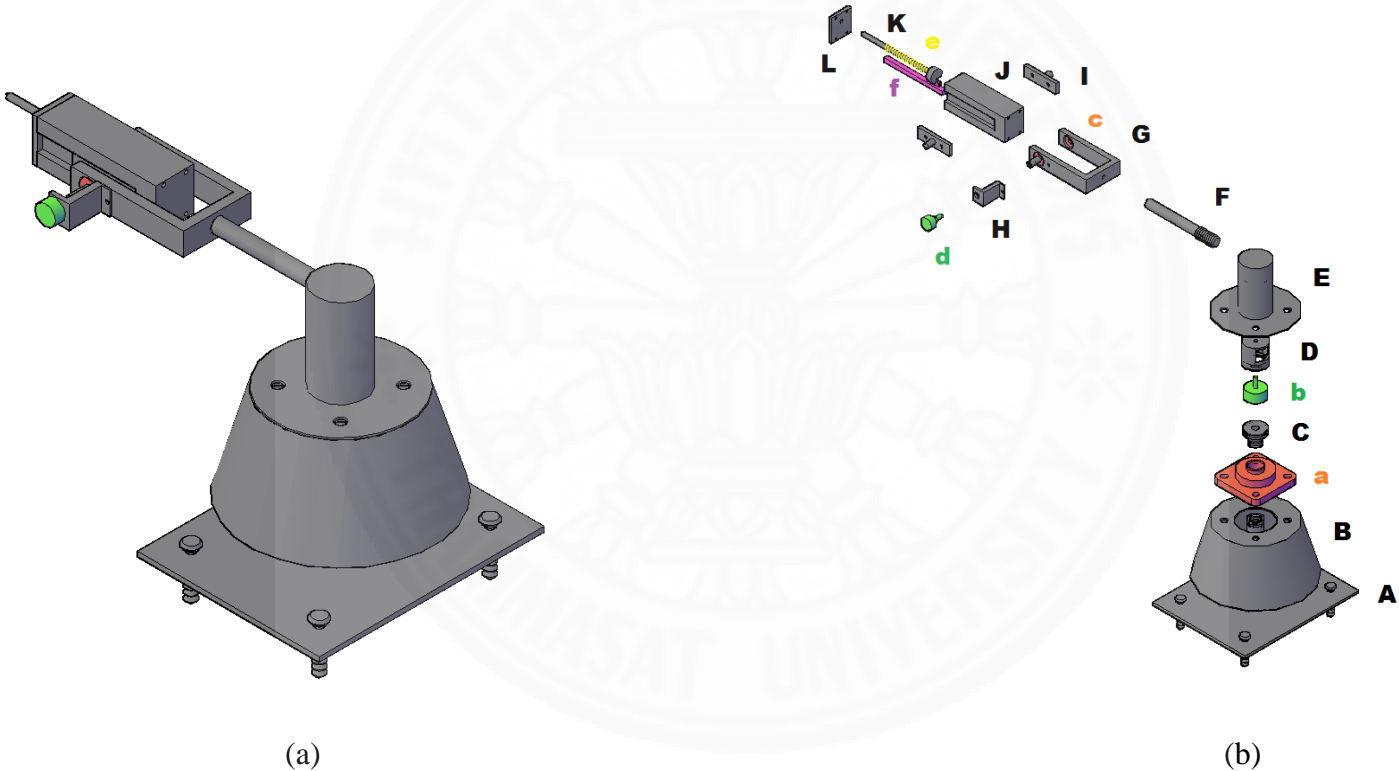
The measurement device (a) completely assembled (b) Decomposition
